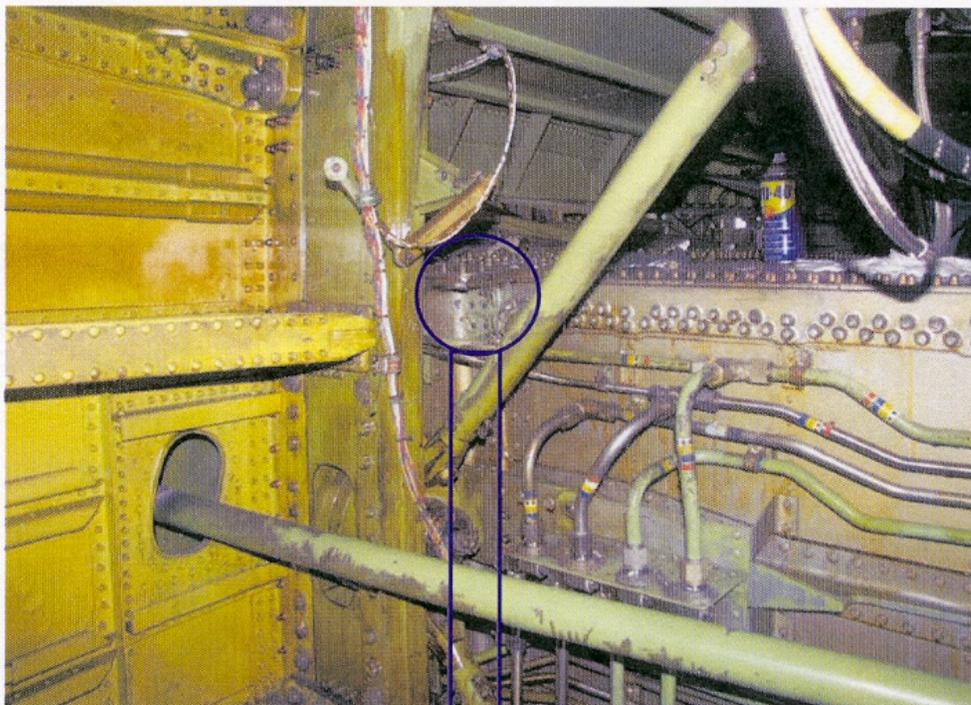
Figure A. LH Horizontal Stabilizers Hinge Fittings Crack View Looking Forward
